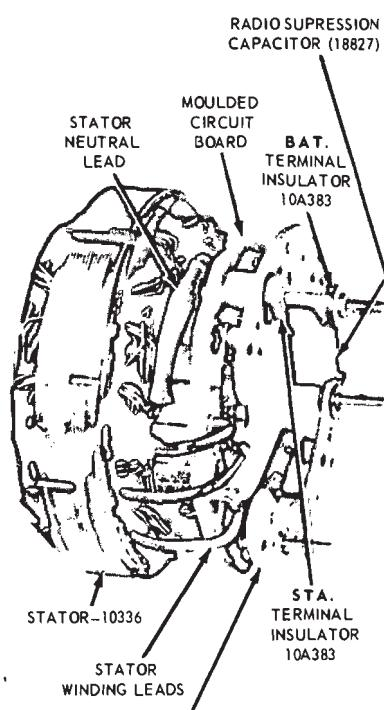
Stator Lead Connections—Except With Integral Regulator
